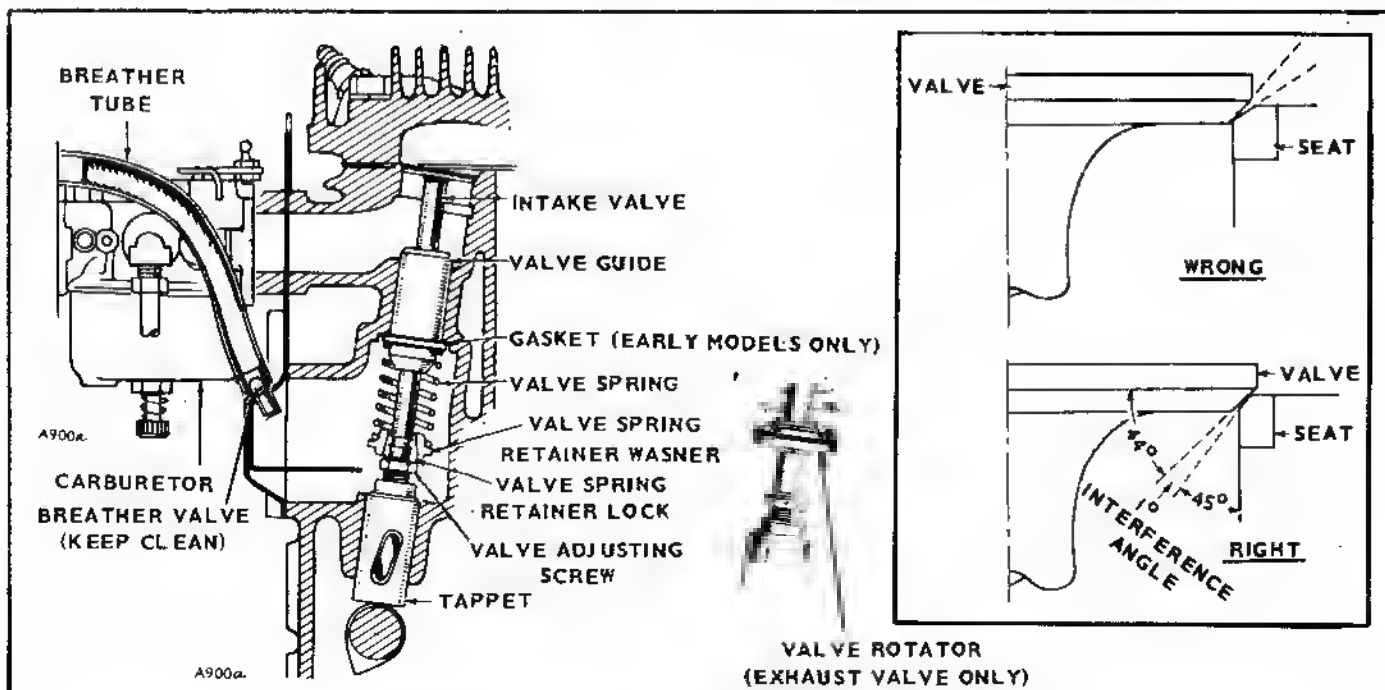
VALVE SYSTEM AND VALVE GRINDING ANGLES
